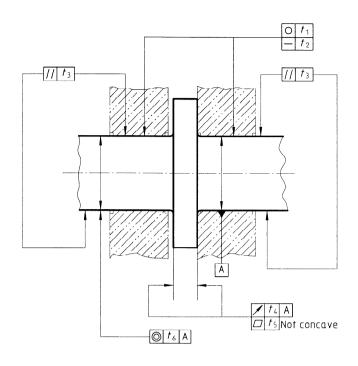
Shaft with thrust collar for journal thrust bearings, capable of carrying load on both
